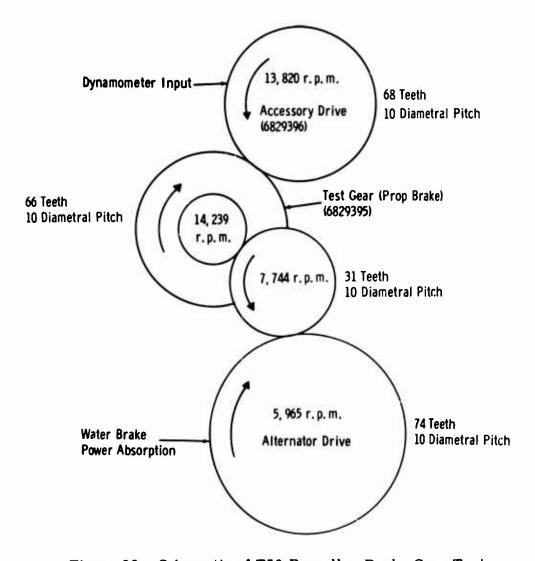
Schematic of T56 Propeller Brake Gear Train.
